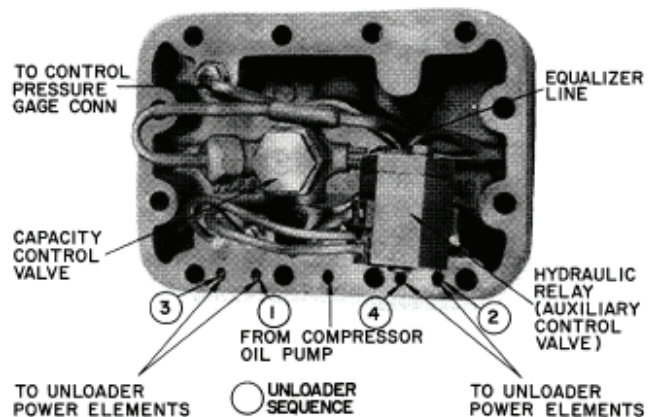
Compressor Hand-Hole Cover and Assembly (5F40 and 5F60)
